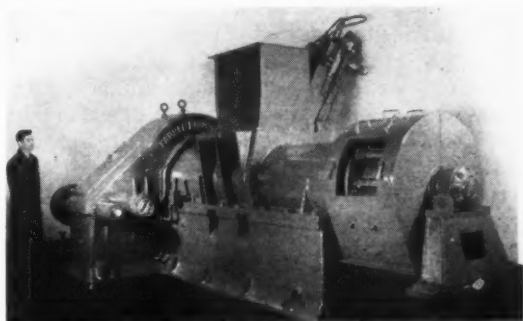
Extruder-pelletizer with side-delivery head showing cut-off knives for producing pellets of raw rubber
